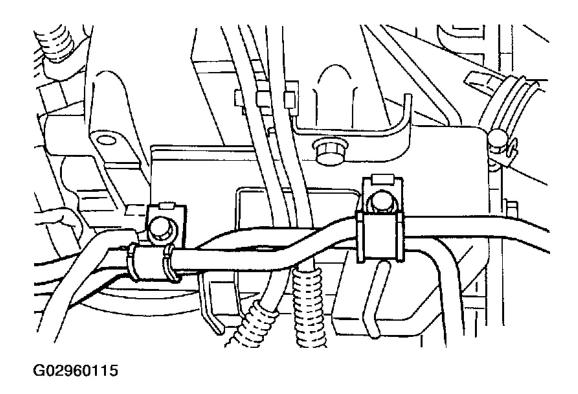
Tightening Power Steering Pump Bracket Bolt Courtesy of SUBARU OF AMERICA, INC.
